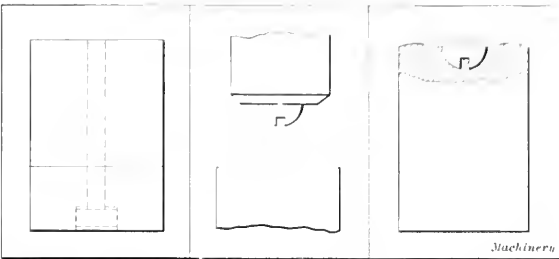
A Kink for saving Die Stock Fig. 36. A "Hub" for a Punch Blank Fig. 37. Punch after hubbing
